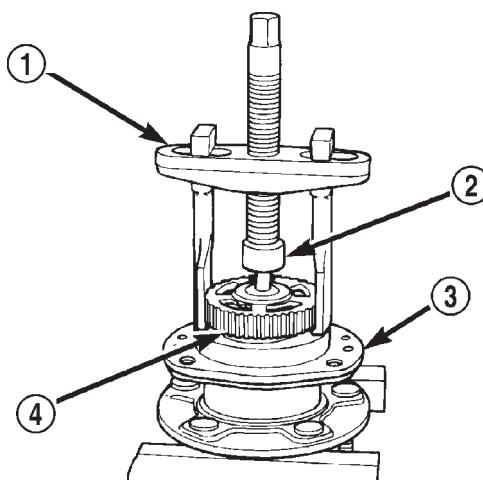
Tone Wheel Removal From Hub/Bearing Assembly
